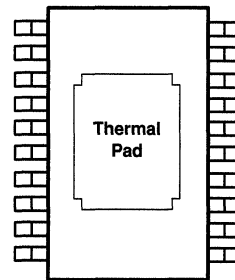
Bottom View of PWP Package, Showing the Thermal Pad
